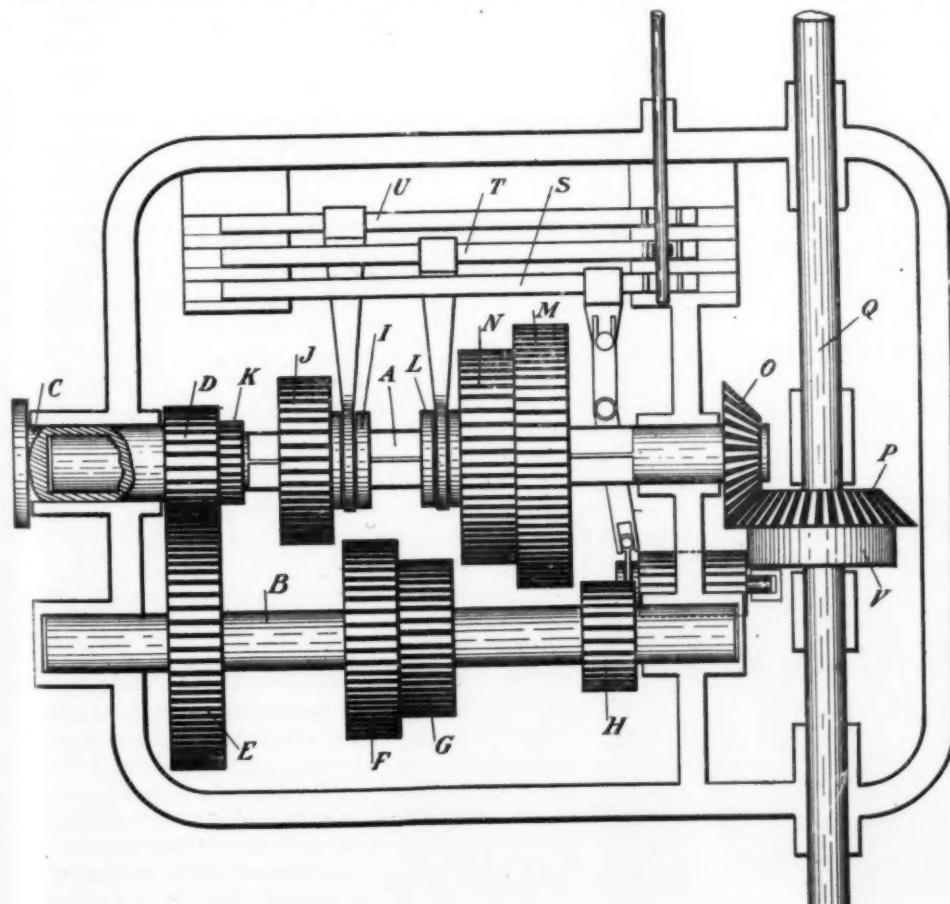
FOUR-SPEED SELECTIVE TRANSMISSION WITH BEVEL GEAR DRIVE TO COUNTERSHAFT.
